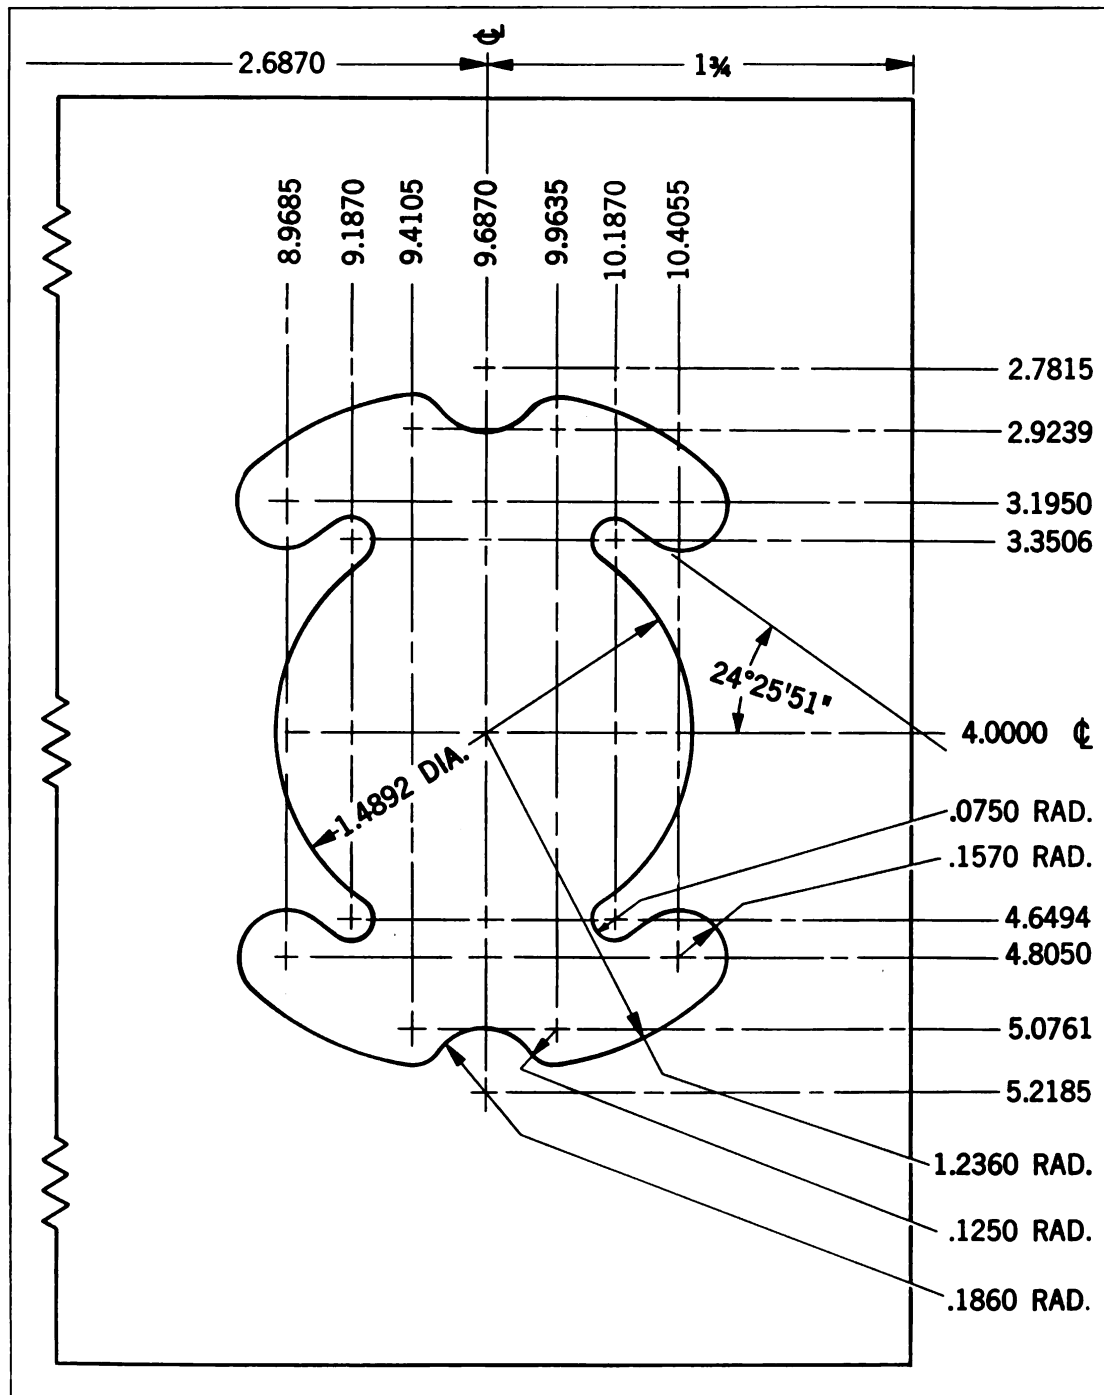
Without modern methods, a problem to inspect as well as to machine.
